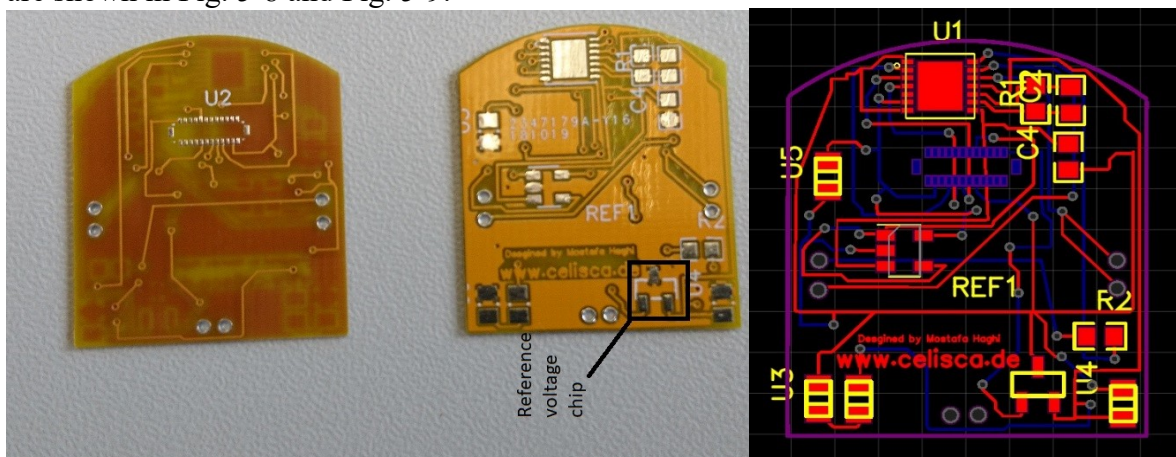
The third version of gas sensor driver (left) and PCB design (right).
